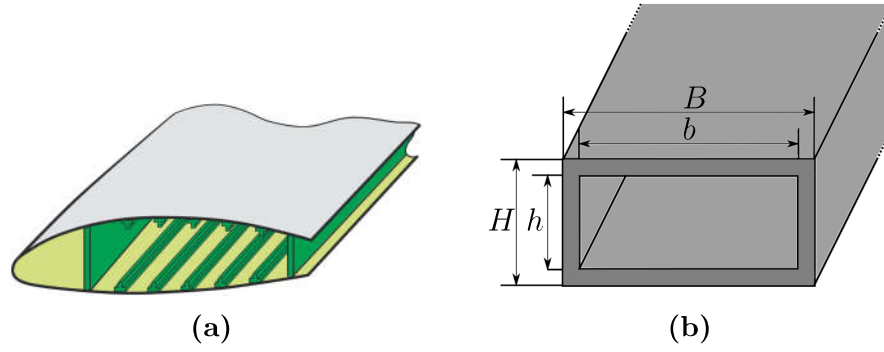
Cross section of an aircraft wing (a)[Rossow et al., 2014] and cross section of the modelled hollow cantilever beam (b)
